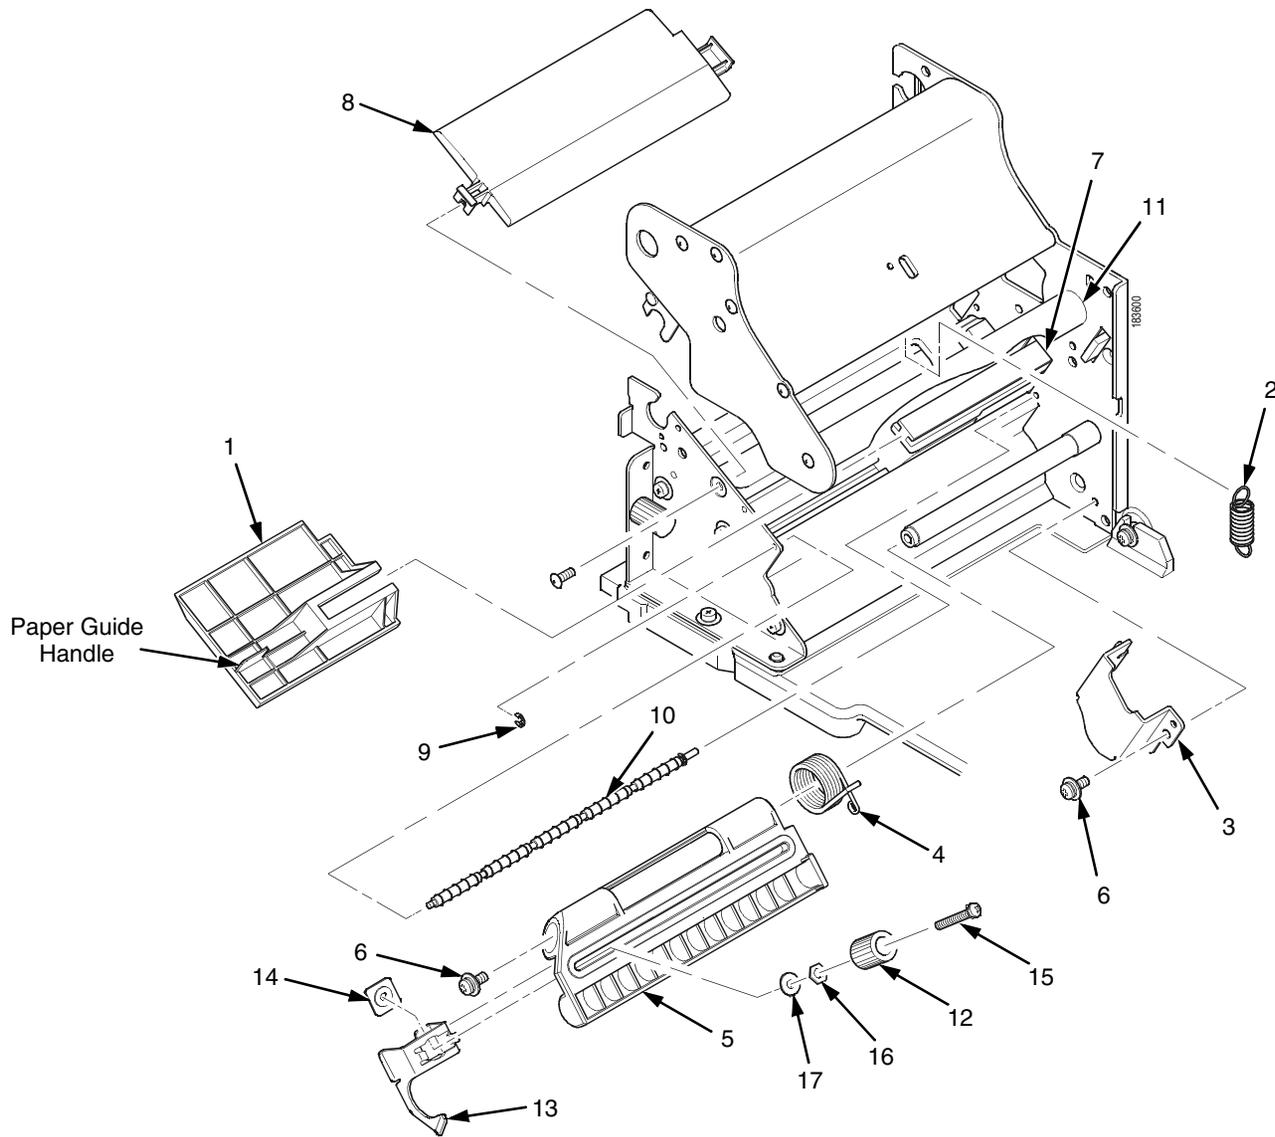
This illustration is an exploded view of the paper guide and media damper holder.
